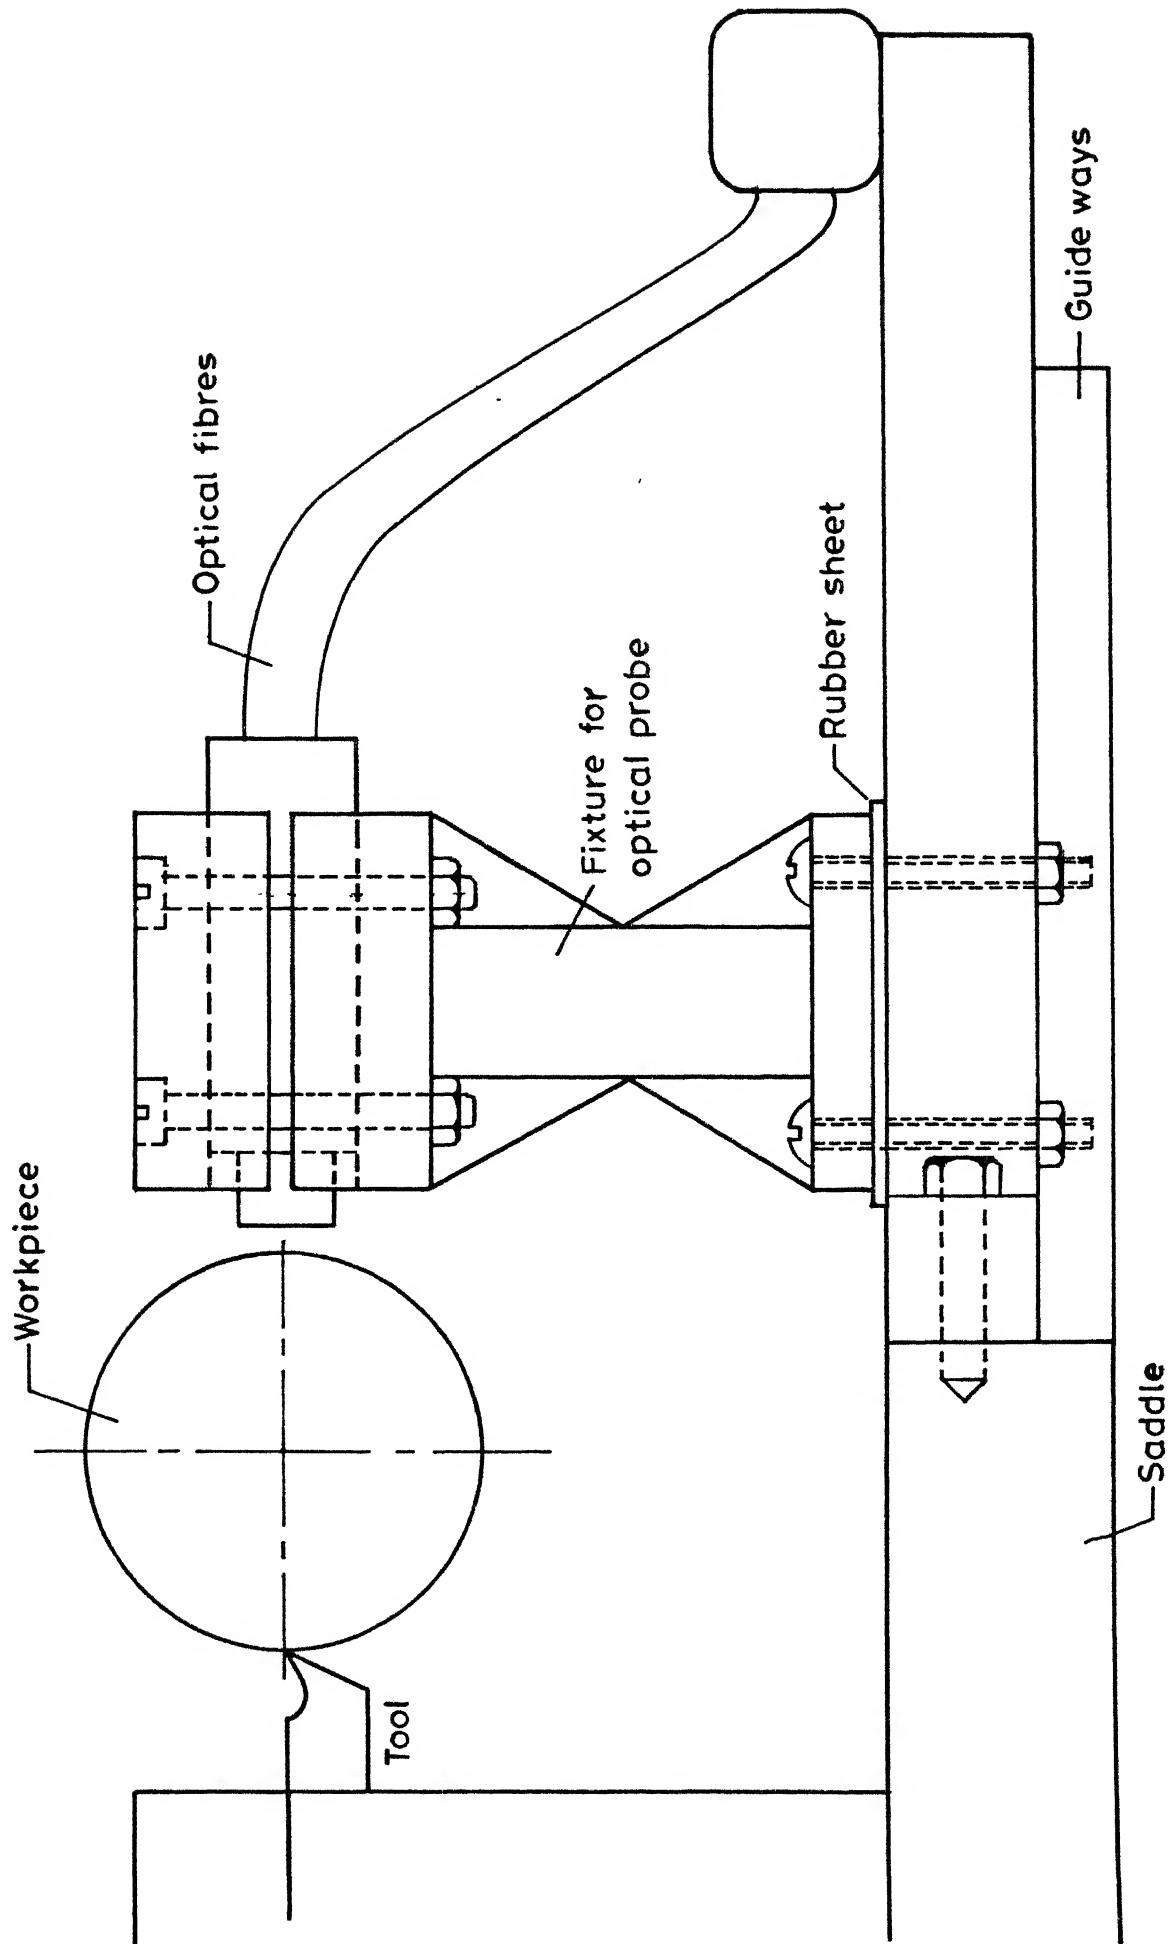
Figure showing the optical probe mountings on the lathe.
